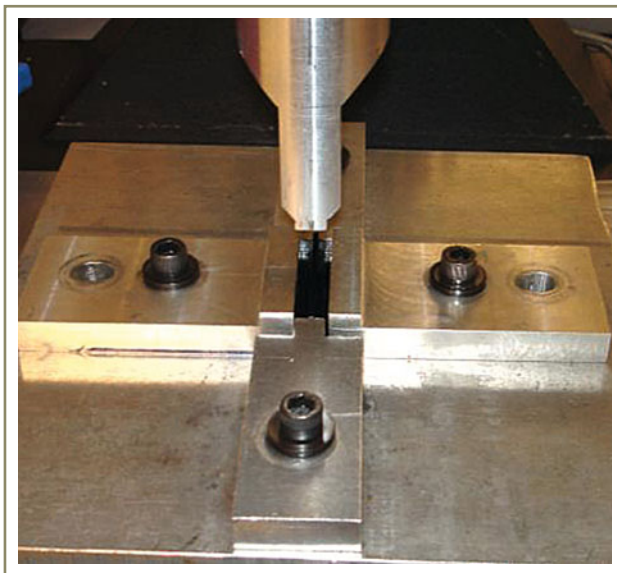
Welding fixture and horns for AWS G1.2 test samples
